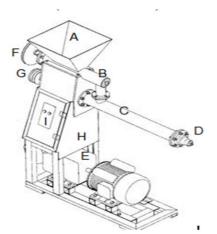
Isometric drawing of the extruder used- LEGEND A- Hopper, B- Feeding Conveyor, C- Extruder worm, D- Die Unit, E- Power train, F- Conveyor pulley, G- Extruder pulley, H-Extruder Housing, I- Control switch
